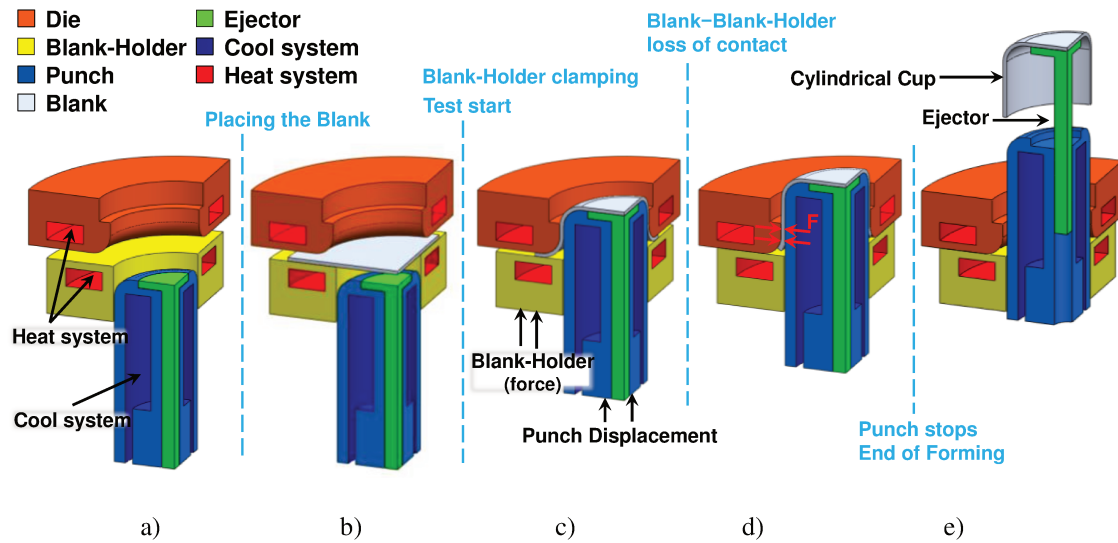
Drawing of a cylindrical cup: a) Heating the die and blank holder to 200°C, punch kept at RT by water cooling system; b) blank heating; c) Cup drawing; d) Ironing; e) Ejection step.
